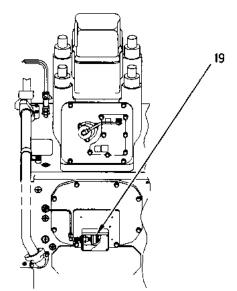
Engine Mounted Sensors Right Side View (19) Prelube pressure switch.
